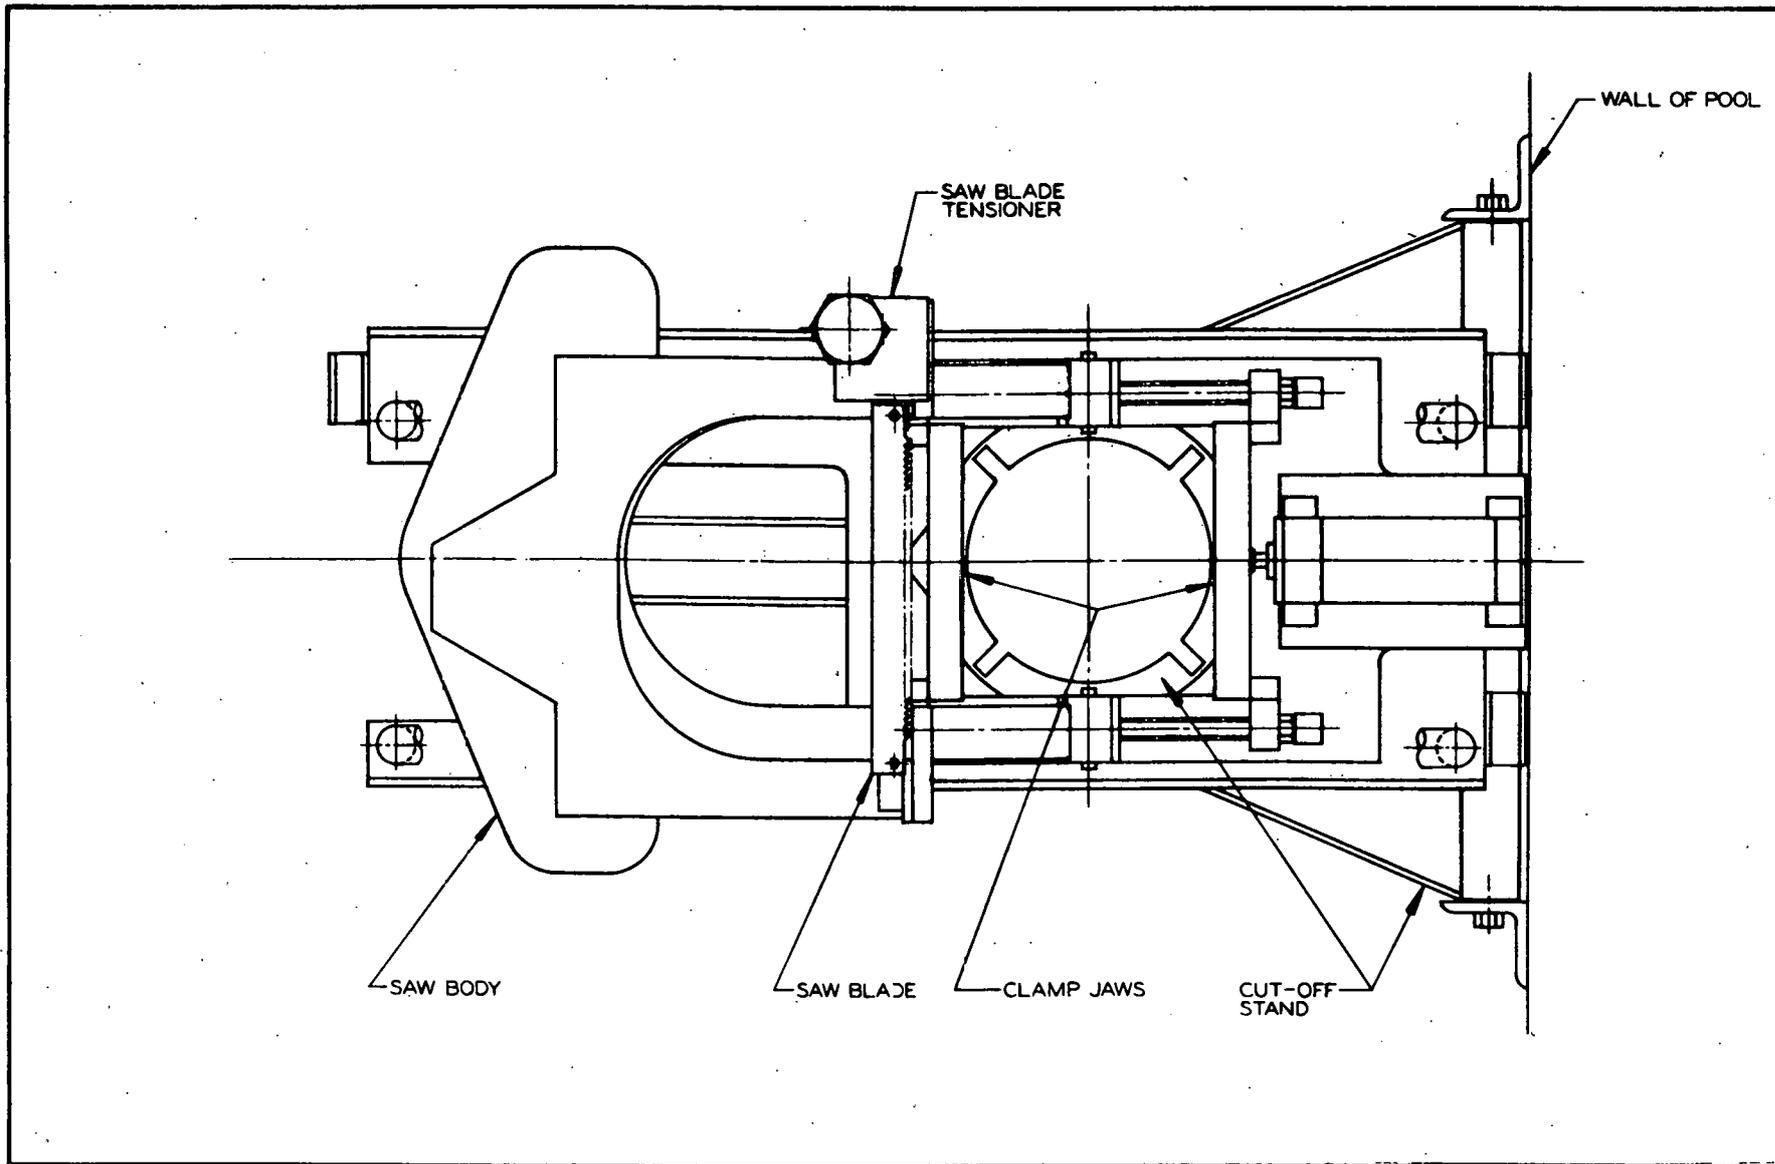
Underwater Saw Facility - Plan View (43-202-795)
